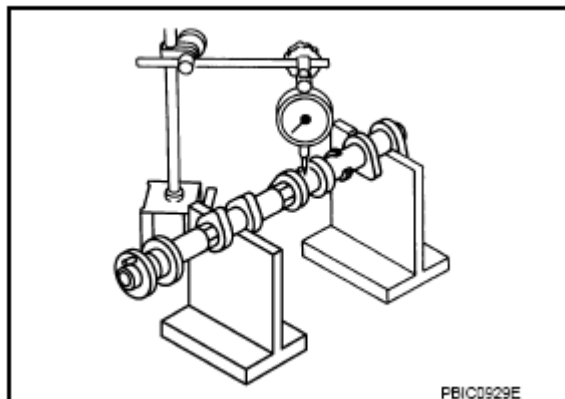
Checking Camshaft Runout Using Dial Indicator
